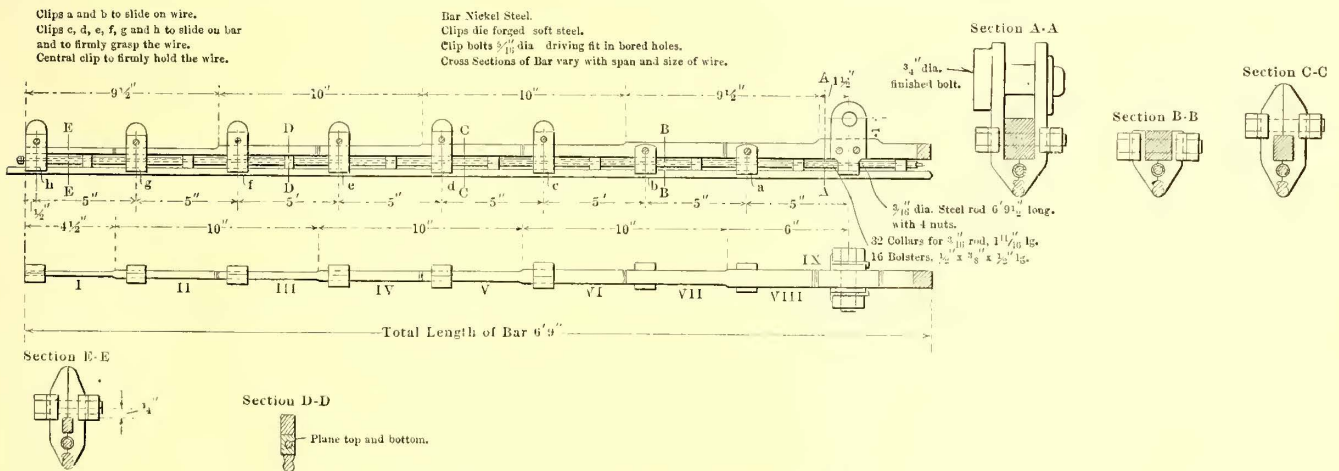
CROSS AND LONGITUDINAL SECTIONS AND PLAN OF FLEXIBLE HANGER
